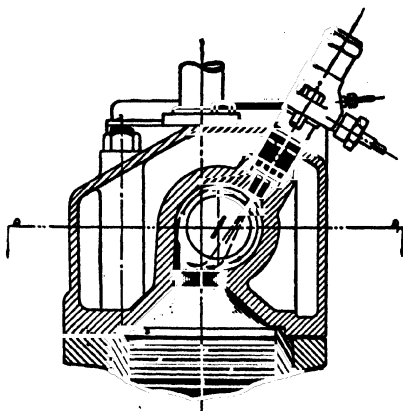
The Palmer Marine Diesel, vertical cross section through a patented cylinder head illustrating the tangential injection of the fuel into the combustion chamber. The exhaust and air intake valves are arranged horizontally.
